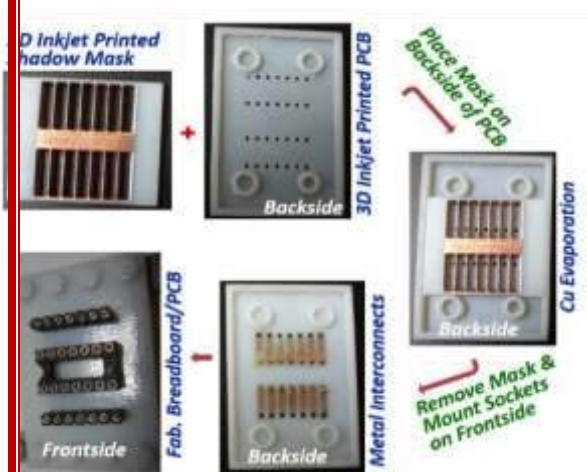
PCB fabrication process using evaporated Cu and a 3D printed shadow mask
